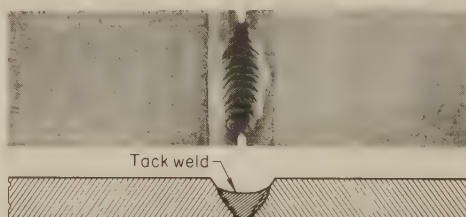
Preferred contour and relative size of tack weld to obtain successful fusion with main butt weld in pipe
